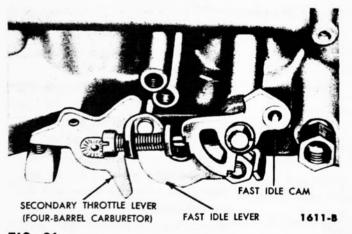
Primary and Secondary Throttle Levers and Fast Idle Cam Installed
